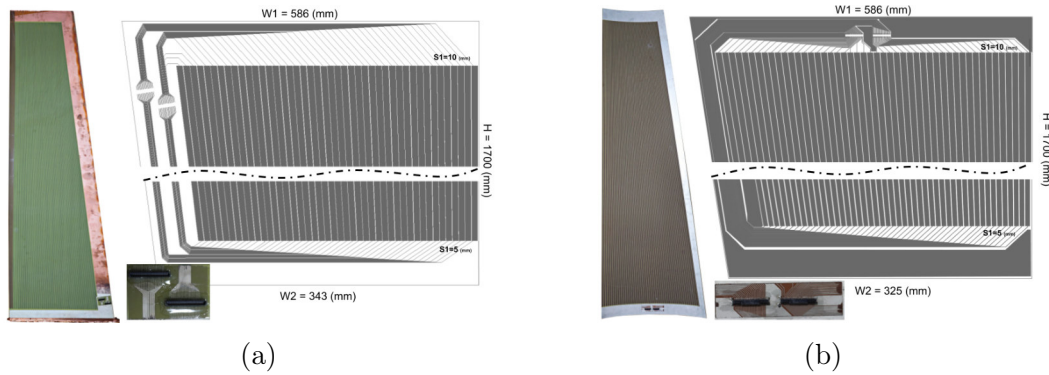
(a) A photo of the first version of the strips PCB and its schematic drawing. (b) A photo of the second version of the strips PCB and its schematic drawing.
